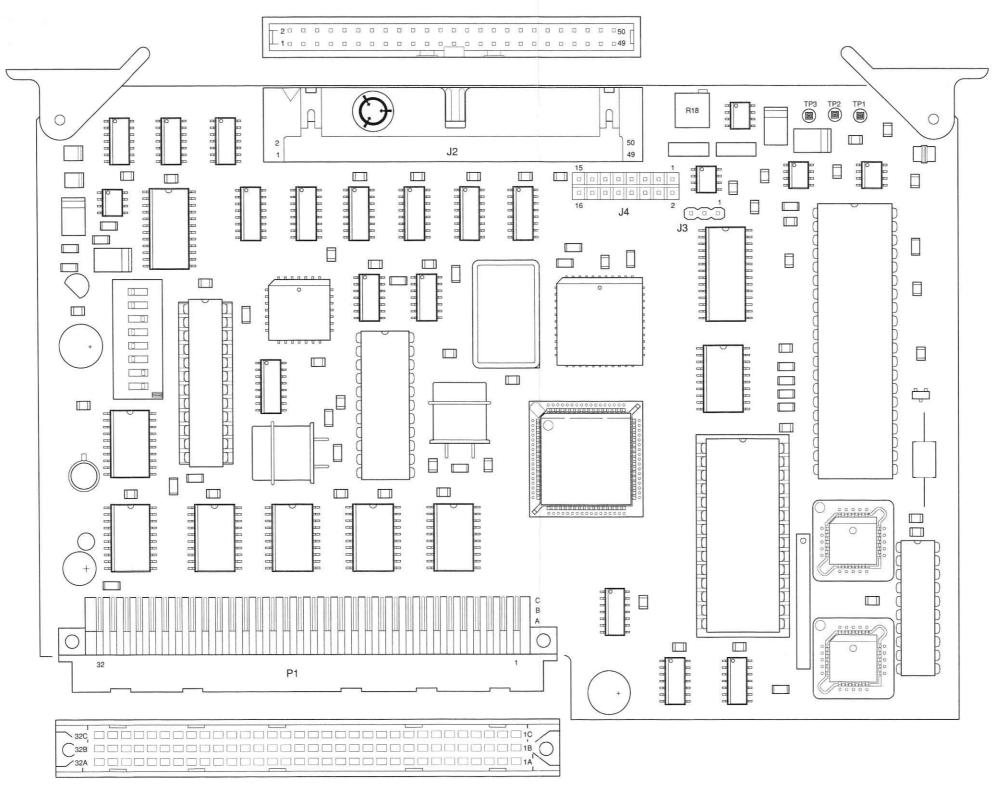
34A5A32 PC Board Assembly Component Locator Diagram
